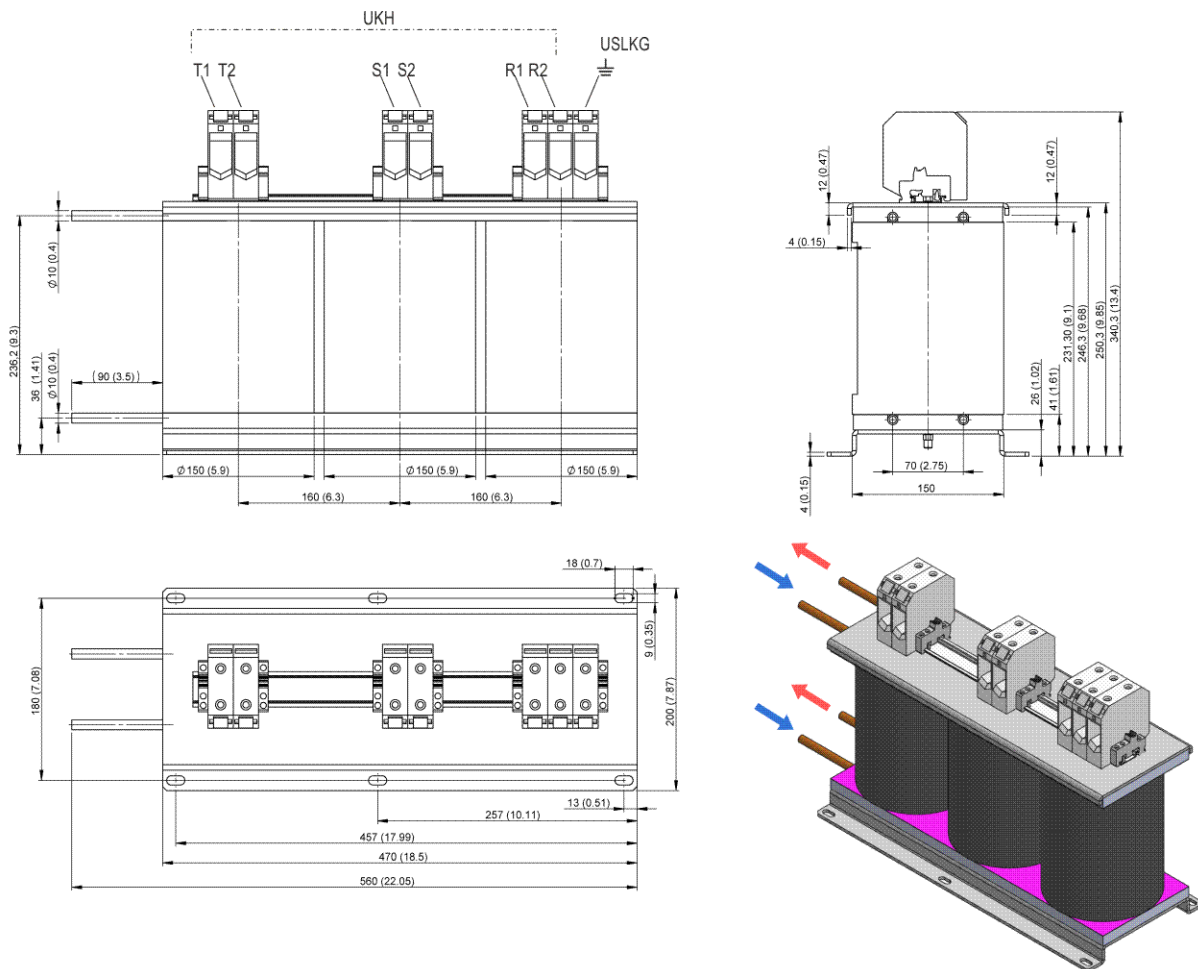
Dimensions of the choke module 02171400 in mm (inch)
